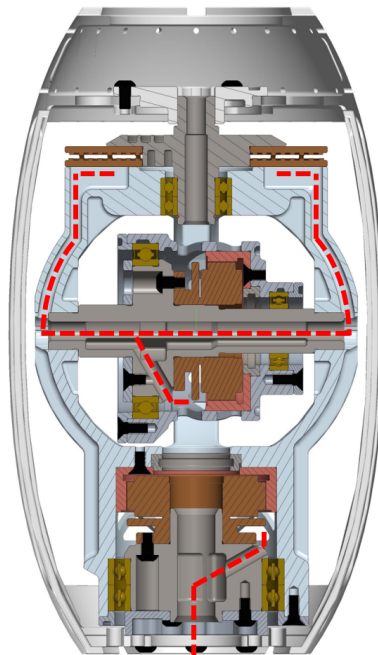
Cross sectional view of assembly depicting the channels for wires
